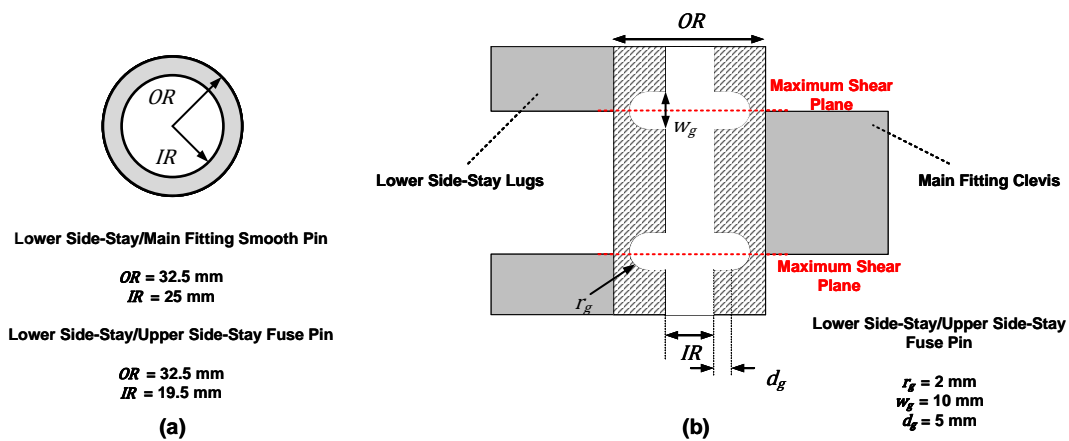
The dimensions of the (a) smooth and (a, b) fuse pins in the lower side-stay assembly.
